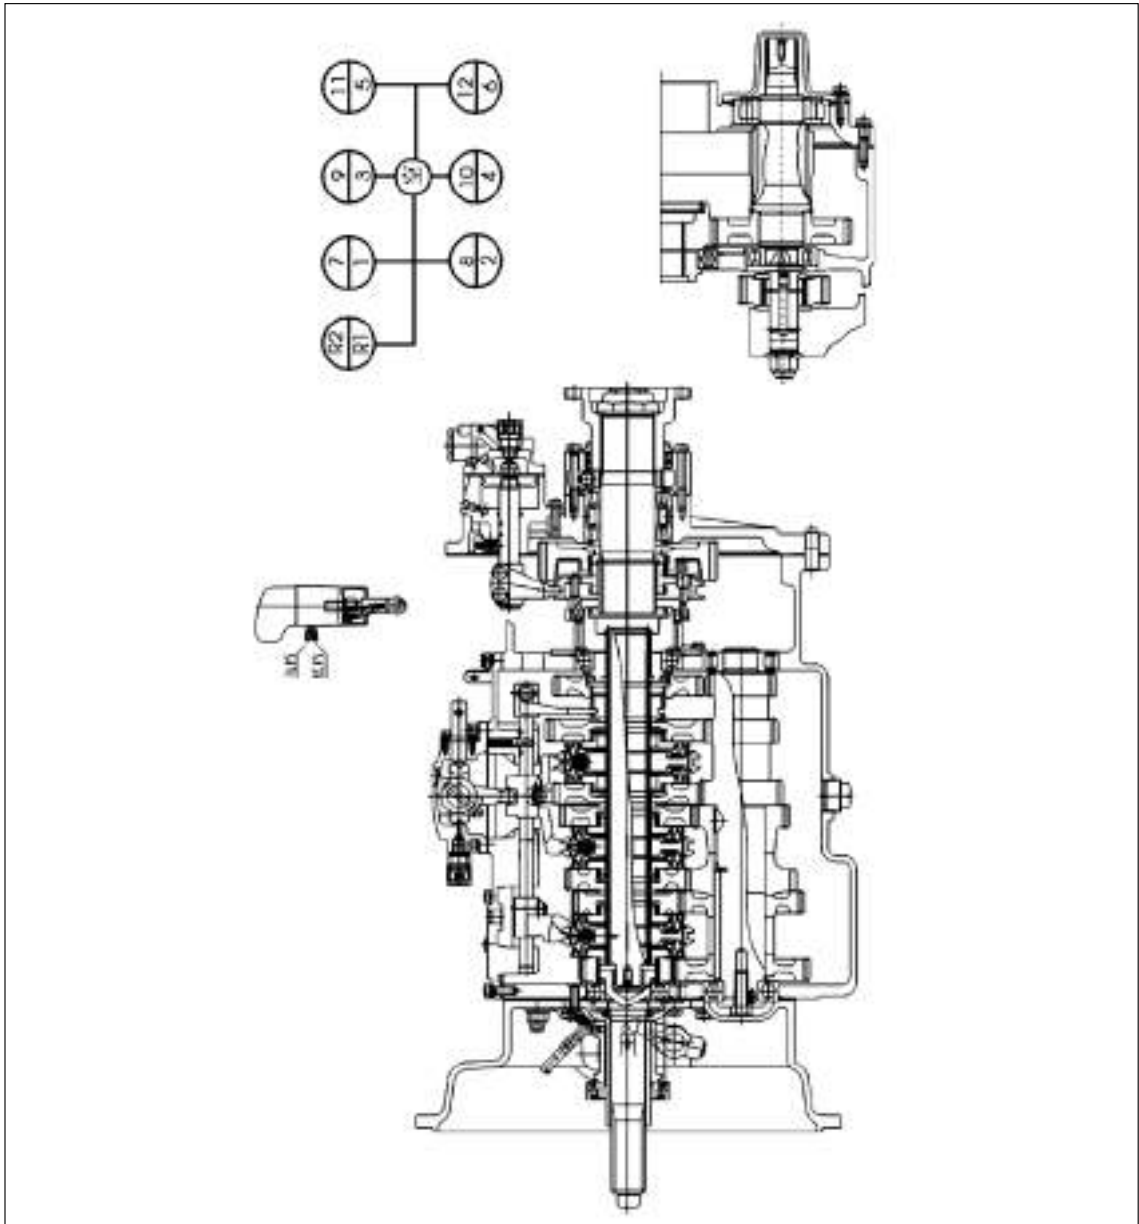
Main Section Drawing for 12-Speed Serial Transmission Assembly
